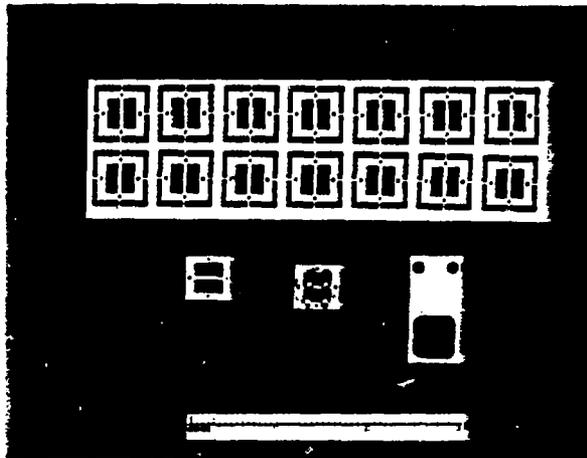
Parts for M2 quad assembly. Stainless steel pole tips are welded to photo-etched s.s. plates, and mounted on a boron nitride insulator. Alignment of the poles is then precise with respect to the skewer holes shown.
